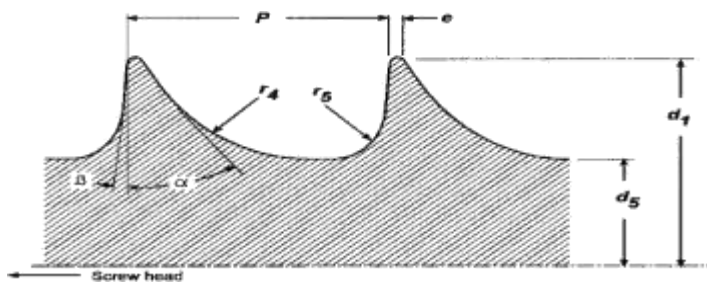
Schematic diagram of HA screw thread dimension (Table 2)
